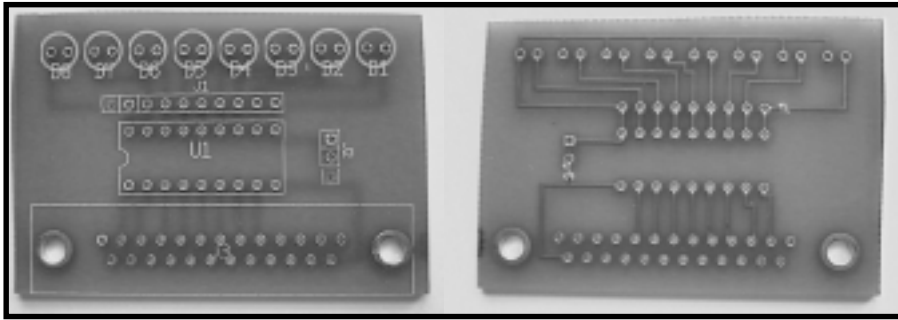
This board was custom made for this circuit, but you can use perf board material as well. We also recommend socketing the ULN2803 instead of soldering the chip to the board in case the chip fails.
